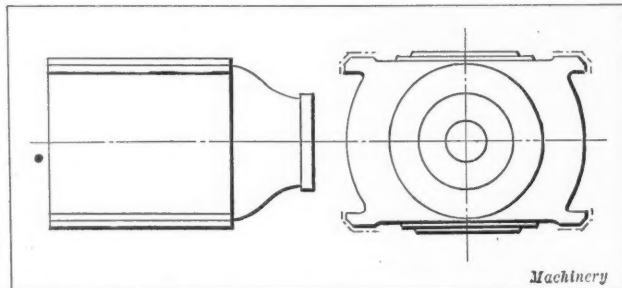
Cross-head with Surfaces to be Milled Indicated by Dot-and-dash Lines
